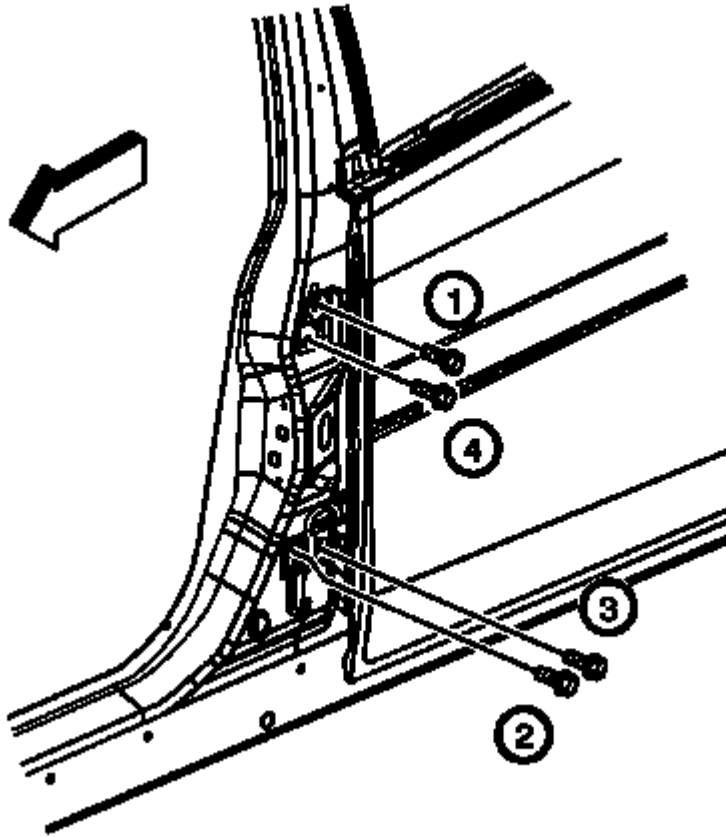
Hinge Pillar Side Bolts (Rear Door)
